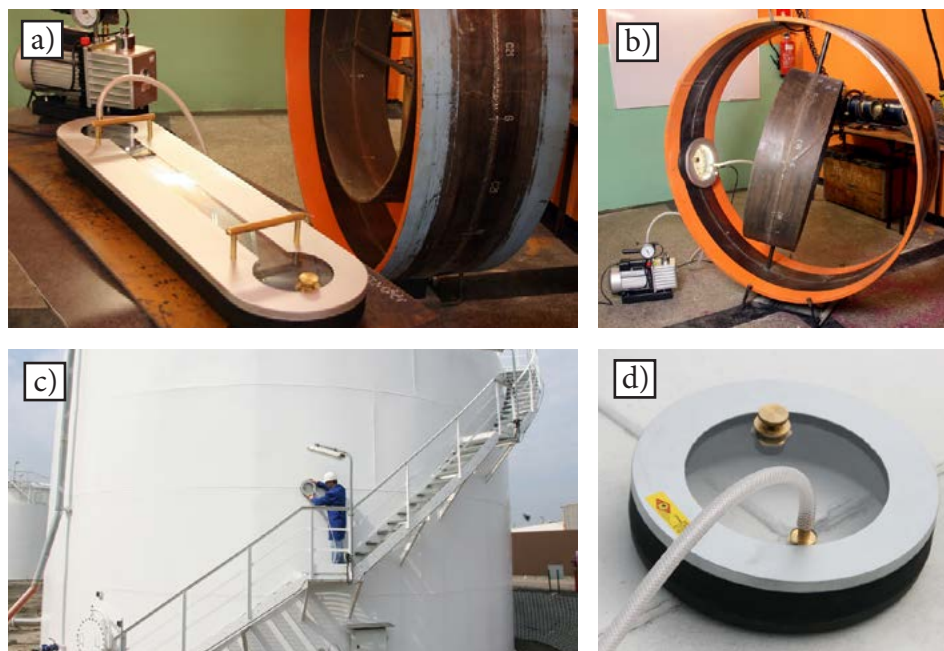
Testing the leaktightness of welded joints using: a) oblong chamber, b) round chamber, c) container for liquid fuels, d) cruciform joint.
